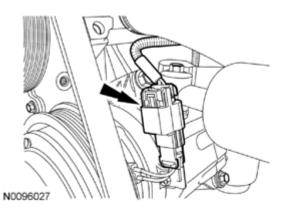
Locating A/C Compressor Electrical Connector Courtesy of FORD MOTOR CO.
